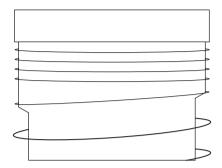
The groove fixture showing the threads extending higher up on the fixture
